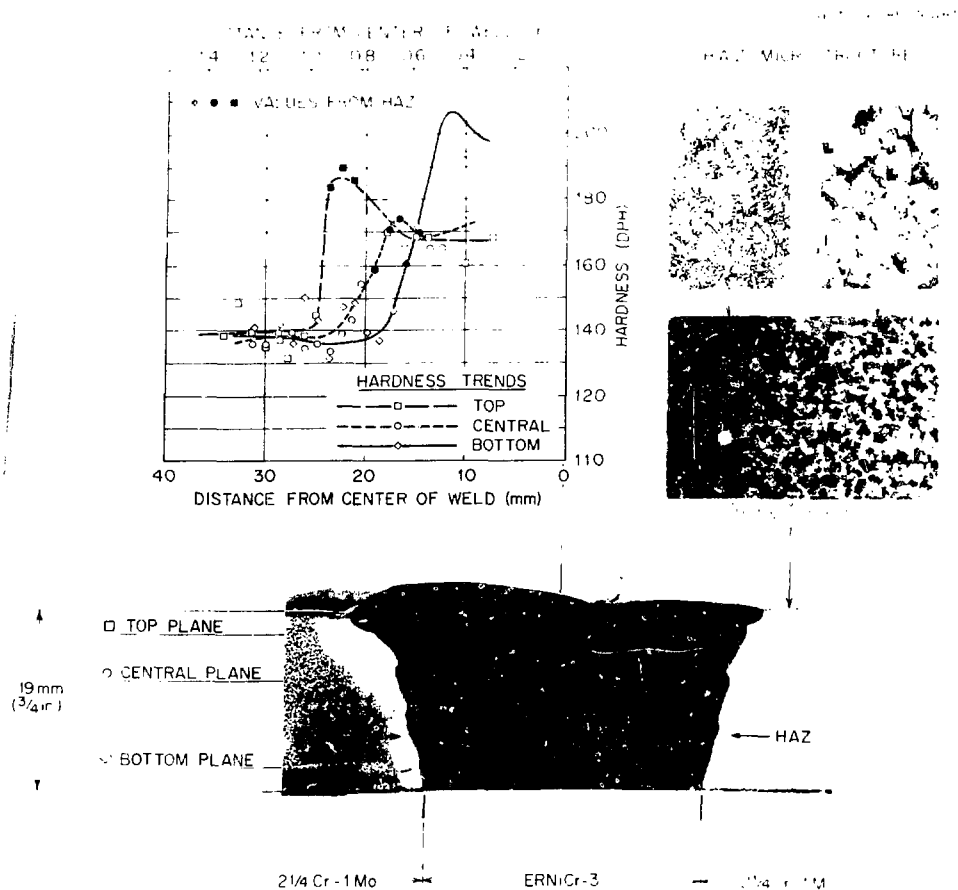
Hardness Measurements on a Weld Joining 2 1/4 Cr-1 Mo Steel with ERNiCr-3 Filler Metal. The weldment was fabricated by the automatic gas tungsten-arc process with hot-wire filler additions and then stress relieved at 737°C (1005 K) for 1 hr.
